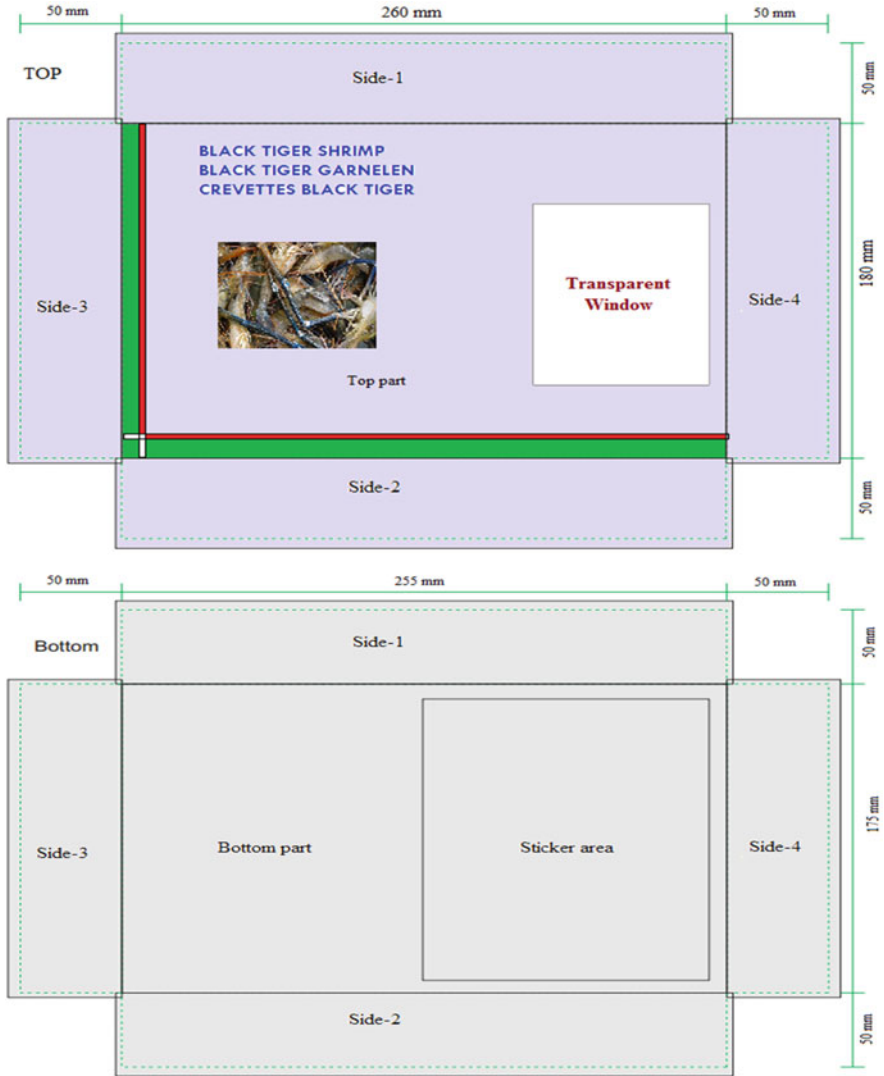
Design and dimension of inner box for semi-IQF shrimp
